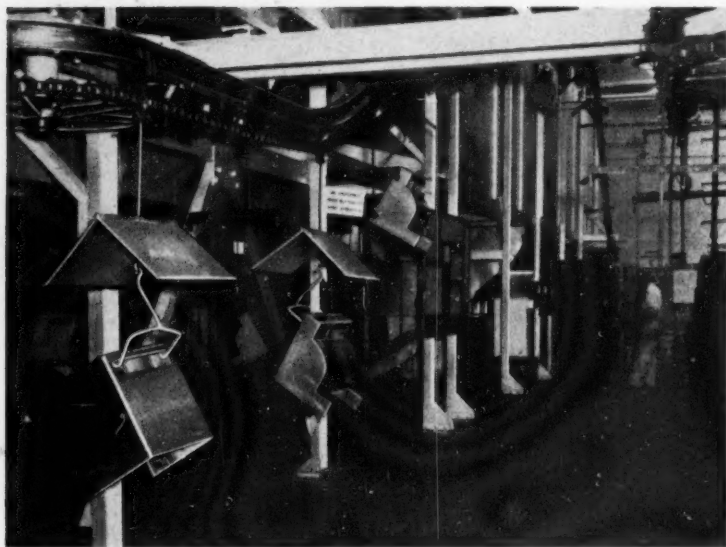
A view of one of the Ballard conveyor stoving ovens in the paint finishing shop
